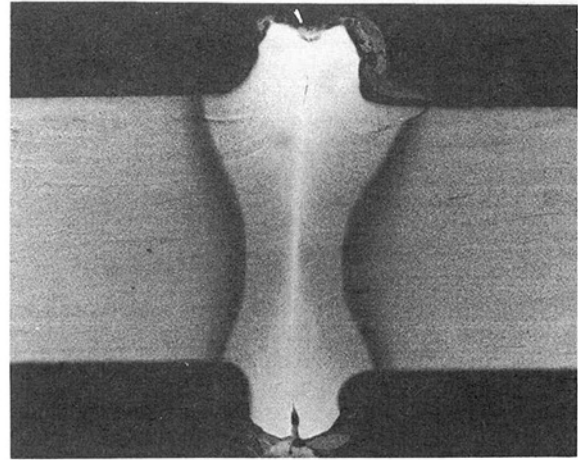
(A) Sample 3, weld made at initial setup conditions (2.5 mm upset distance, 36 mm initial die opening, 10 × magnification)
